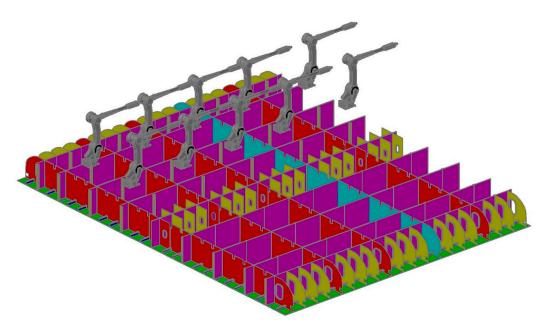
Positioning of the robot welding in the double-bottom assembly process.
